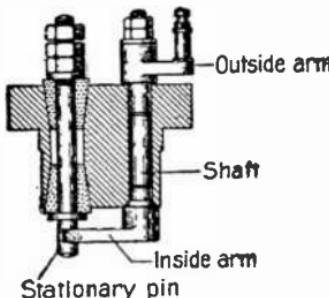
,039.—Igniter for low tension or make and break ignition. By means of mica or stone washers, the stationary pin is electrically insulated from any part of the igniter plug. Through the igniter plug runs a shaft. On the end of this shaft, reaching inside the cylinder is an arm long enough to strike the insulated stationary pin. On the outside end of the shaft is another arm (the outside arm). The shaft can be turned far enough to cause the inside arm to strike and then leave the stationary pin. This turning motion is produced by a push rod working from an eccentric or from a cam. On a two cycle engine this cam is operated by the crank shaft and on a four cycle engine the cam is actuated by timing gears driven from the crank shaft. The stationary pin, the arms and the shaft are a part of the electrical circuit.
